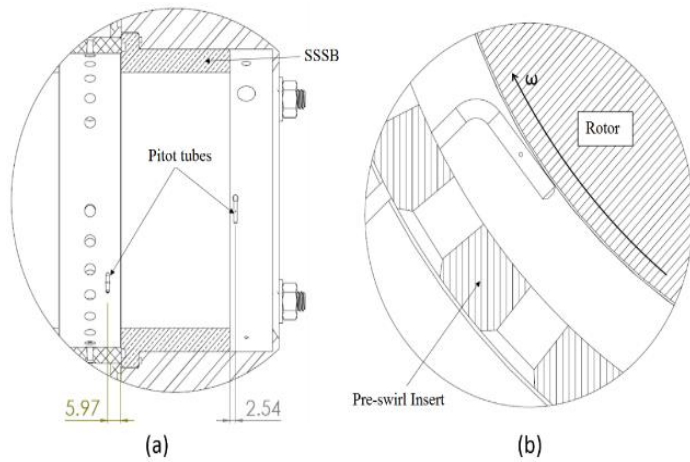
(a) Axial positions of the pitot tubes. (b) Radial view of the inlet pitot tube location. All dimensions in mm. Adapted from [11].
